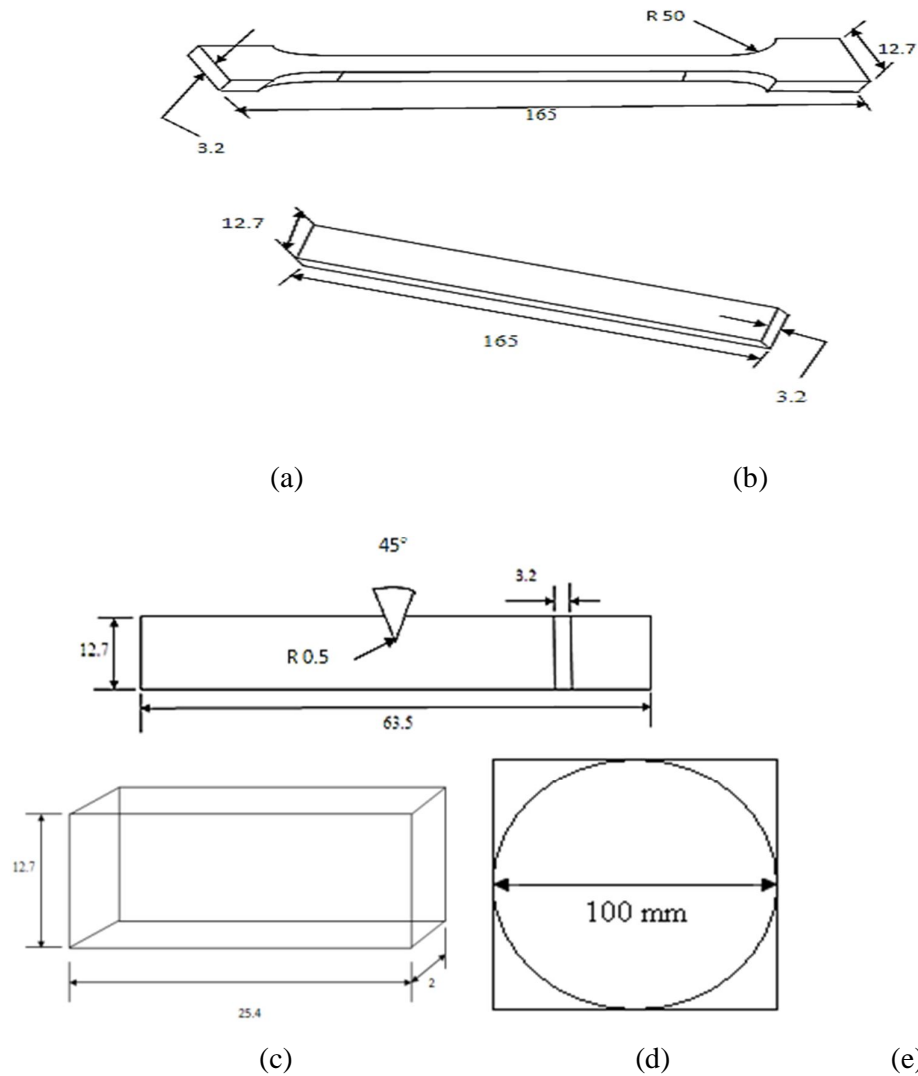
Test specimen, All dimensions are in mm (a) Tensile test specimen; (b) Flexural test specimen; (c) Impact test specimen; (d) Compressive specimen; (f) Abrasion wear specimen
